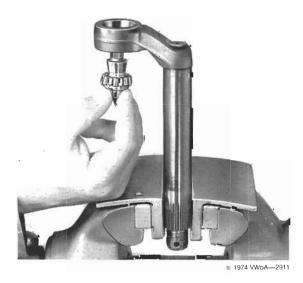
Peg with tapered rollers being installed in peg shaft.
